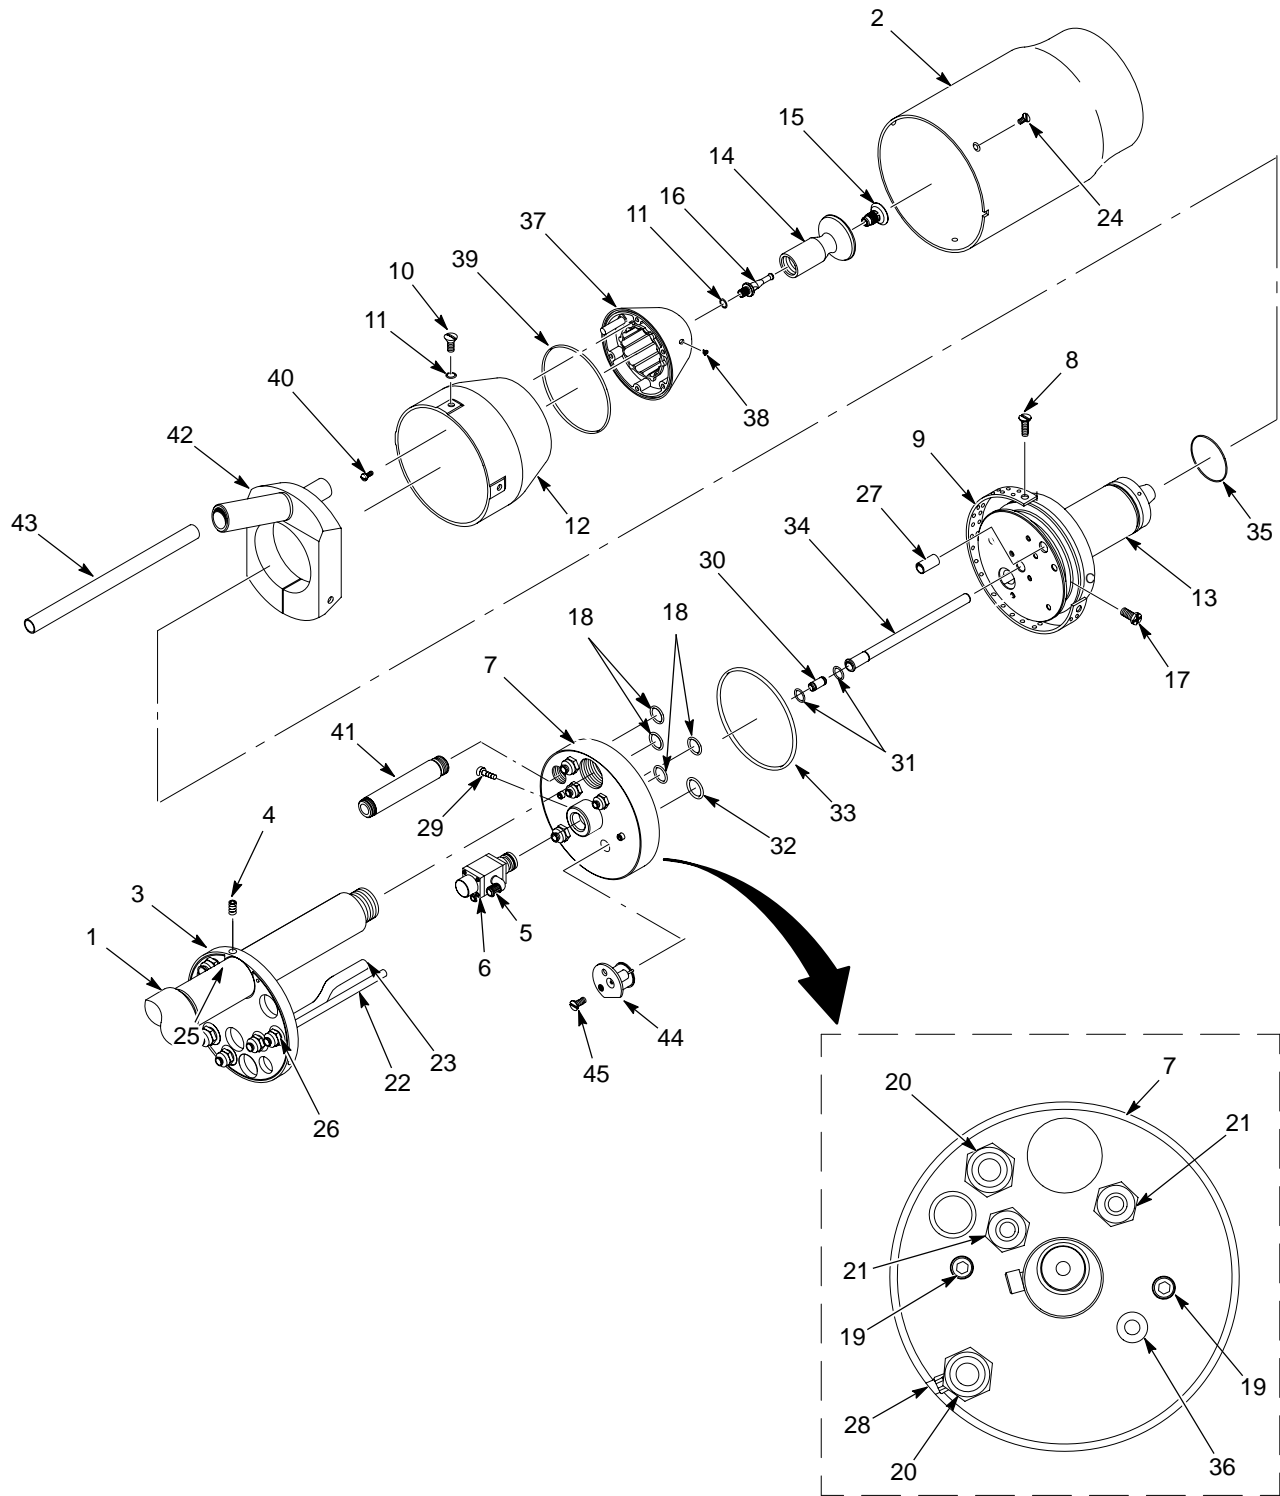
Cable-Fed RA-20 Rotary Atomizer
